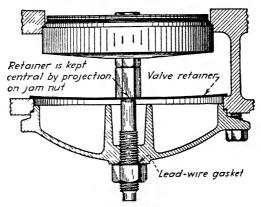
Retainer plate holds Ingersoll-Rand valve assembly in cylinder until jam screw is tightened.
